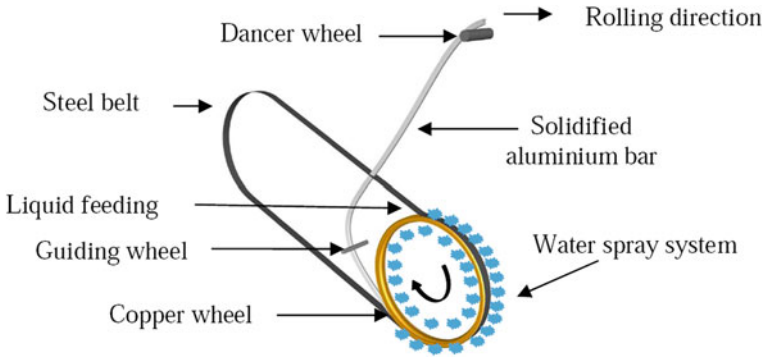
Typical old style wheel and belt caster whereby the bar is pushed sideways to avoid hitting the belt
